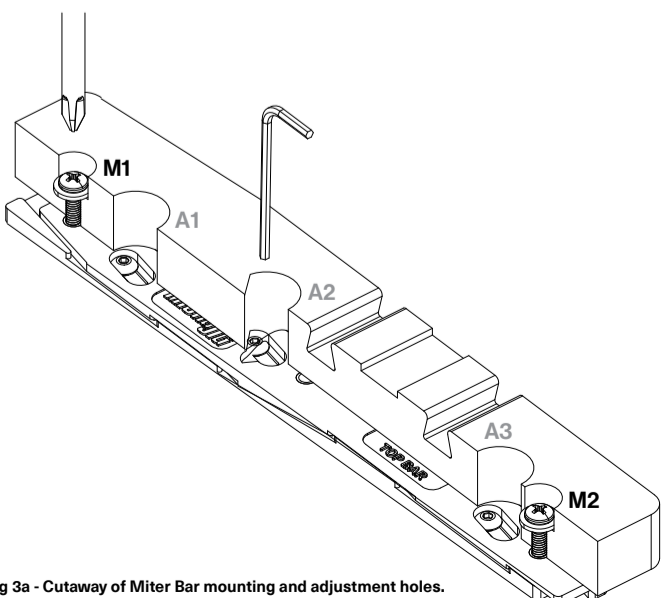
Cutaway of Miter Bar mounting and adjustment holes.
